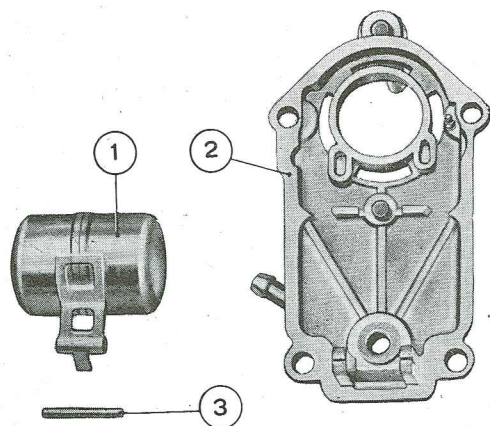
Weber 26 IMB 1 carburetor cover components.
